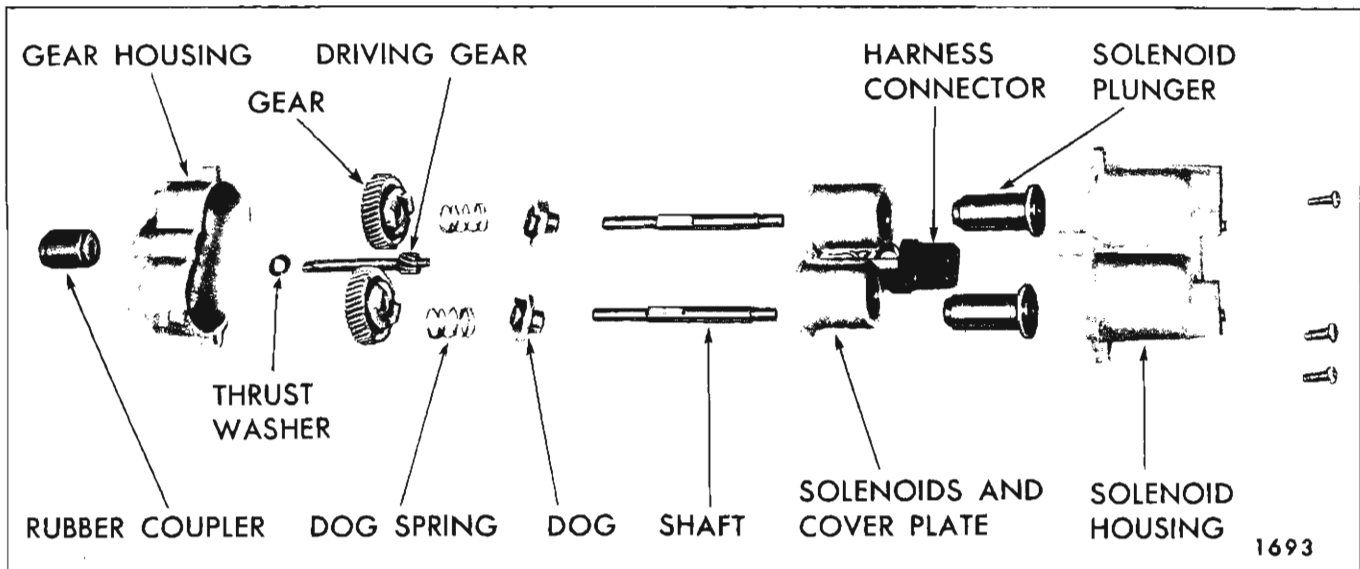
H9—Exploded View of Four-Way Seat Transmission
